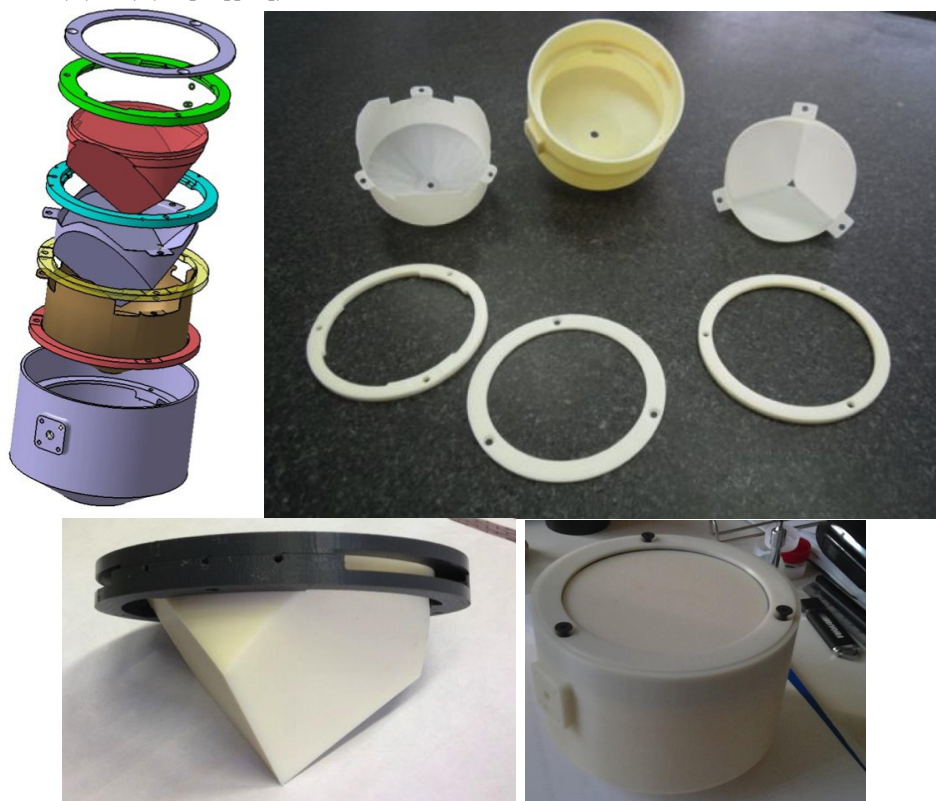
Exploded view (top left) and photos of 3D-printed plastic components of MoonLIGHT.
